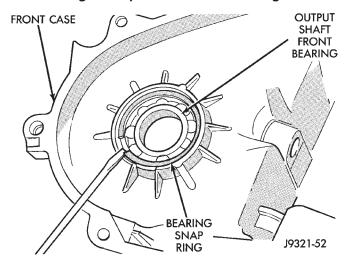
Output Shaft Front Bearing Snap Ring Removal
